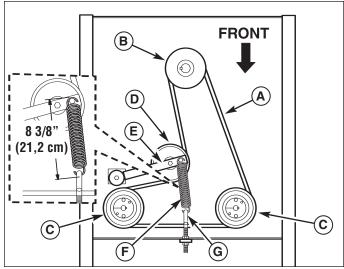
Hydraulic Pump Drive Belt Replacement A. Pump Drive Belt
